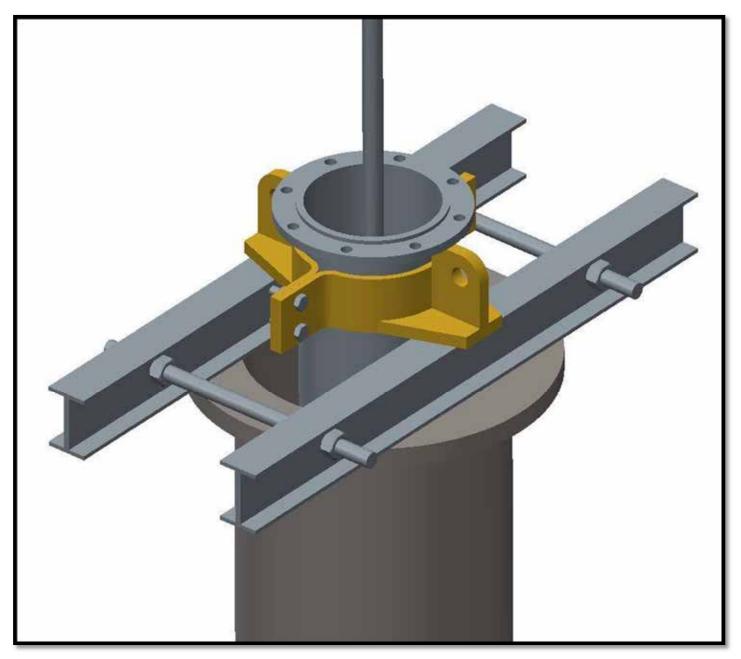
Finished Assembly showing partial pump assembly resting on I-Beams.
